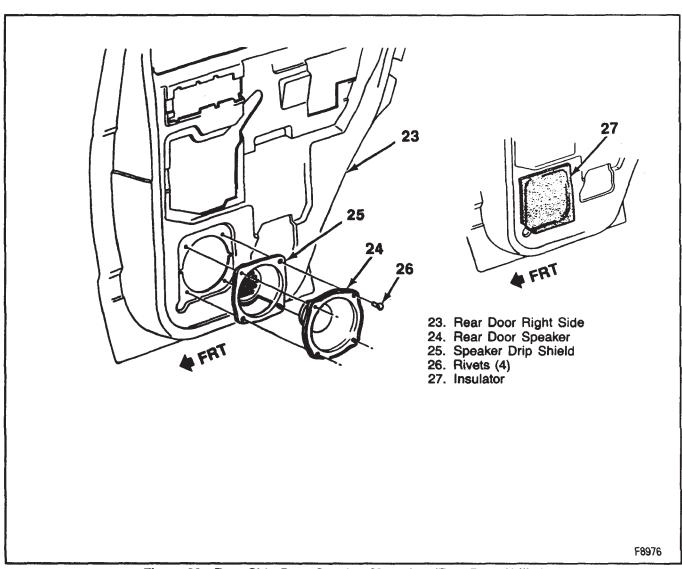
Rear Side Door Speaker Mounting (Four-Door Utility)
